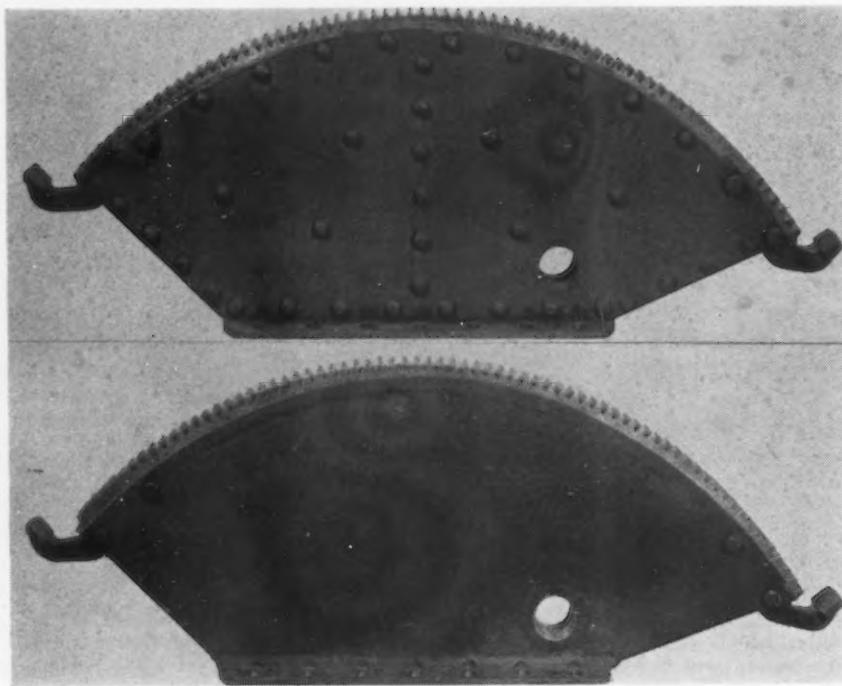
Illustrations contrasting the riveted and welded designs used for the elevating arc sector.
